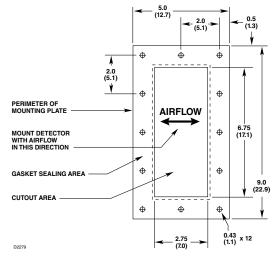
Dimensions of PIRDUCT Mounting Plate in Inches (cm)
